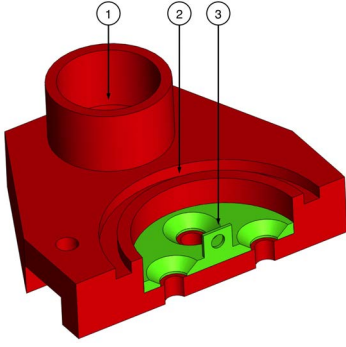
3D CAD section of the support for one end of the springs. (1) Support for the linear bearings, (2) groove for compression spring mounting, (3) hook for extension spring support.
